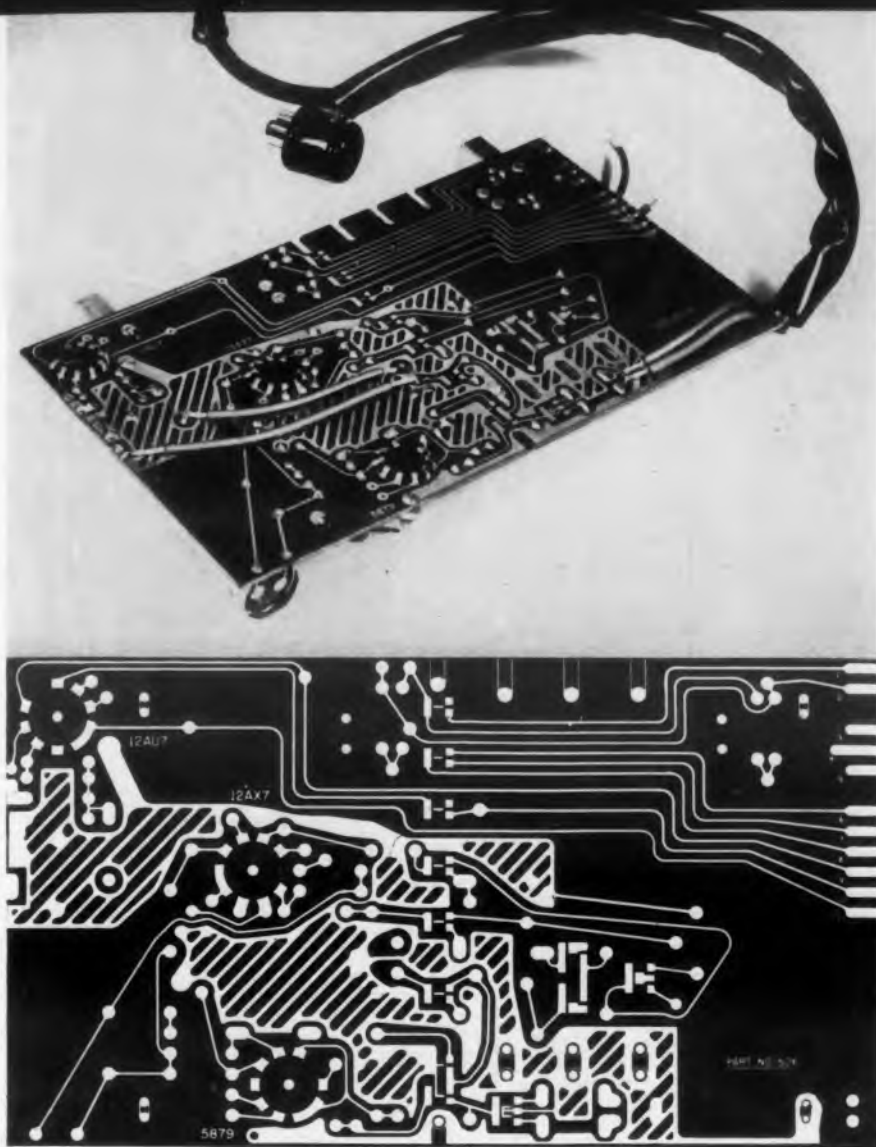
A completed printed wire chassis and the master drawing for the conductor pattern on the top surface. Notice the two "cross-over" wires and the method of breaking up large areas of foil to prevent laminate blistering.
